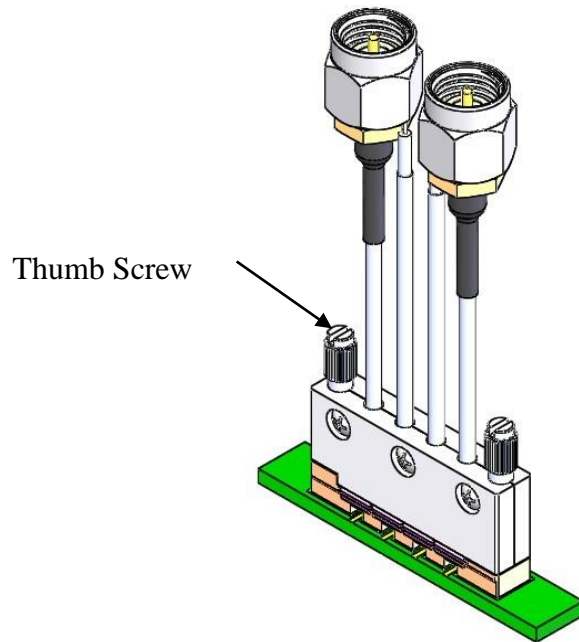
Connector/ Cable assembly, 4 position, Fully Assembled
